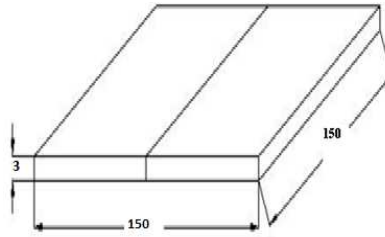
Welded joint piece of AA 6061 and IS319 Brass.
